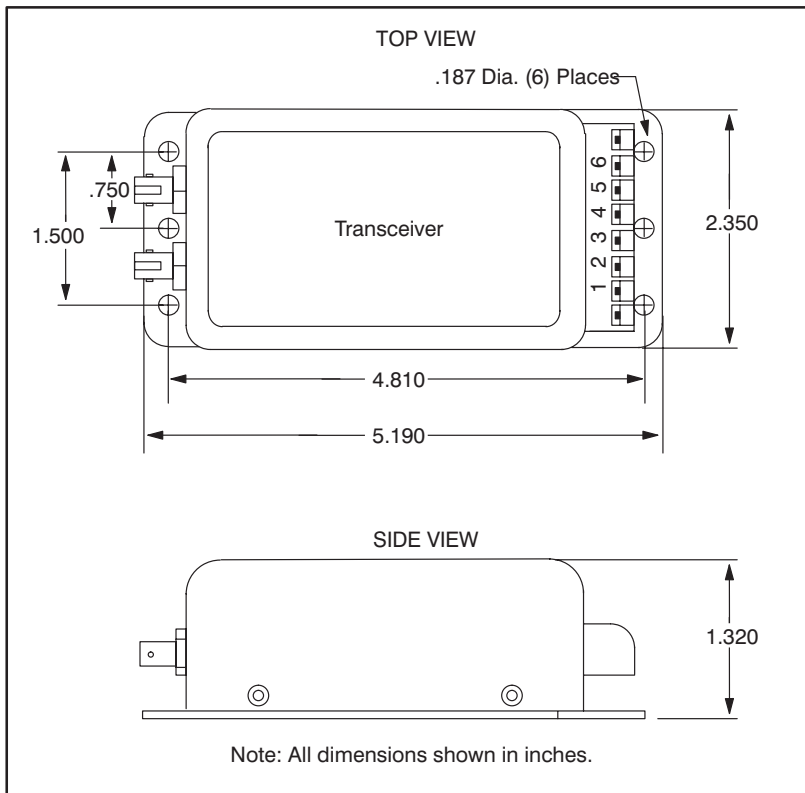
Stand-Alone Transceiver Mounting Dimensions
